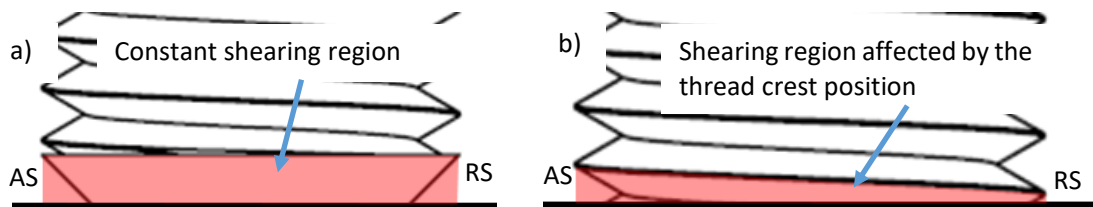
1 Back of the pin (a) filed bottom pin; (b) left hand threaded pin.
